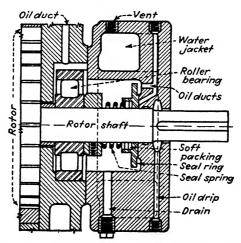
Shaft seal contains auxiliary soft packing. (Courtesy, Yeomans Brothers Co.)
